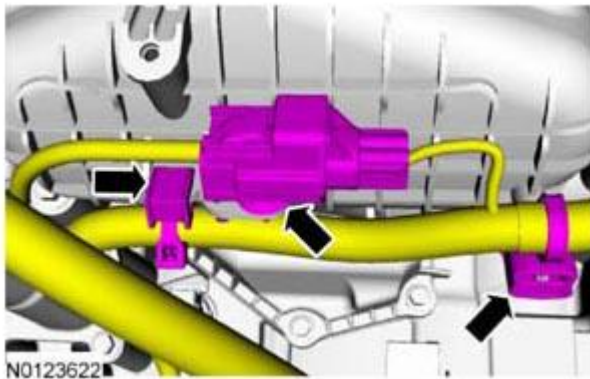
Locating Knock Sensor (KS) Electrical Connector From Bottom Of Intake Manifold
